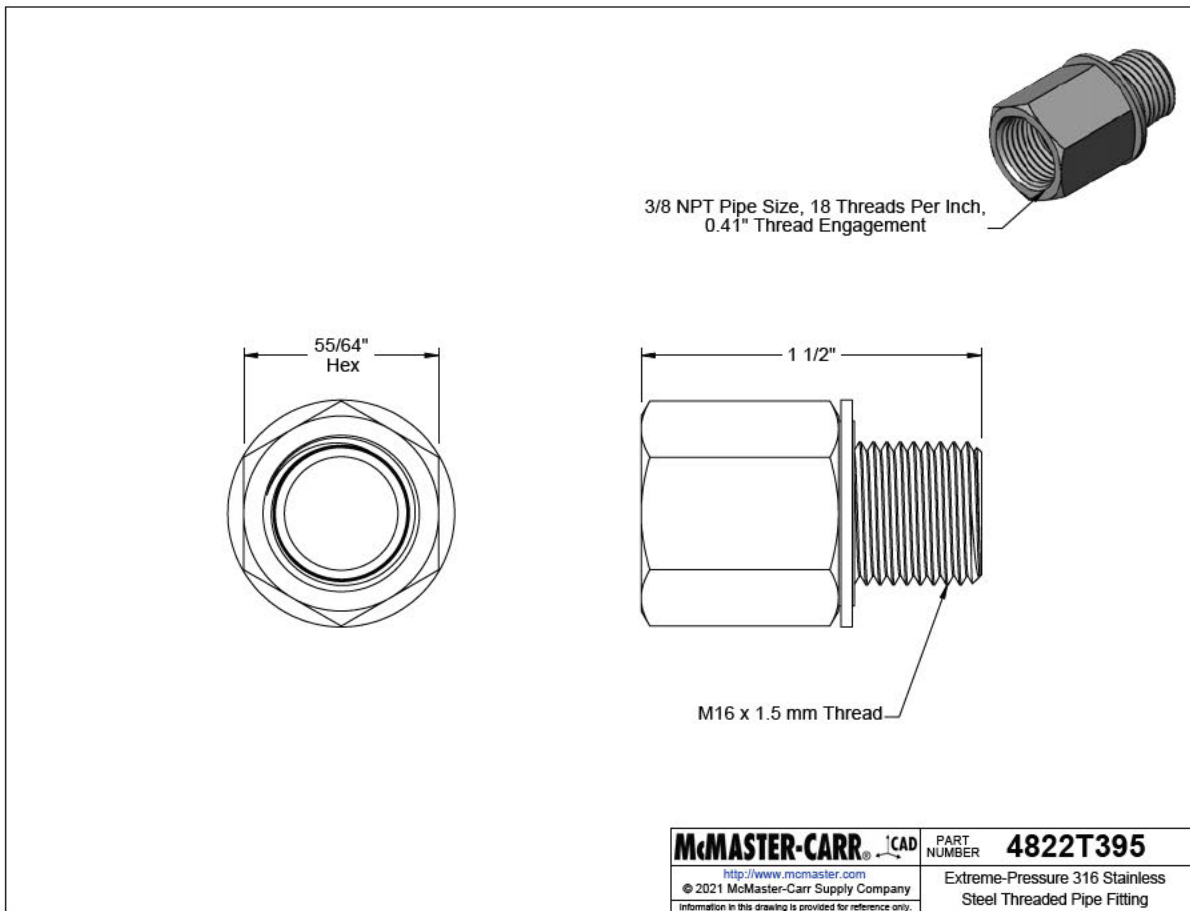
Extreme-Pressure 316 Stainless Steel Threaded Pipe Fitting, 4822T395 [4]
